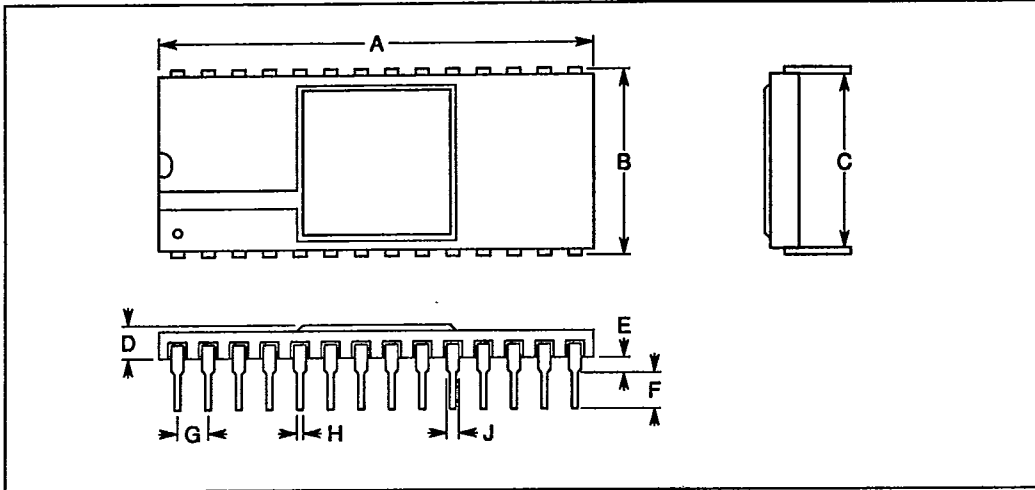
28 pin ceramic dual-in-line package dimensions
